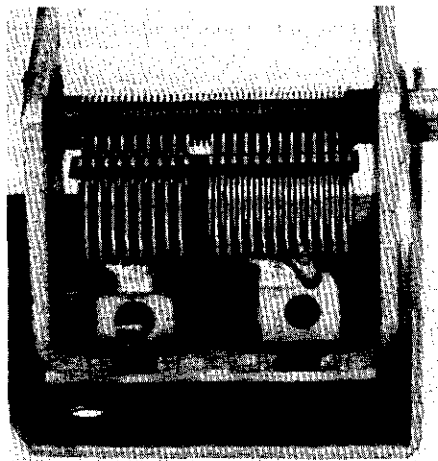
Glenn Yingling uses double-stick pads to mount components that must be isolated from the chassis. This photo shows pads at the front and bottom of a mounted part; pads need not be used in both places if mounting to one surface provides a strong enough bond.
